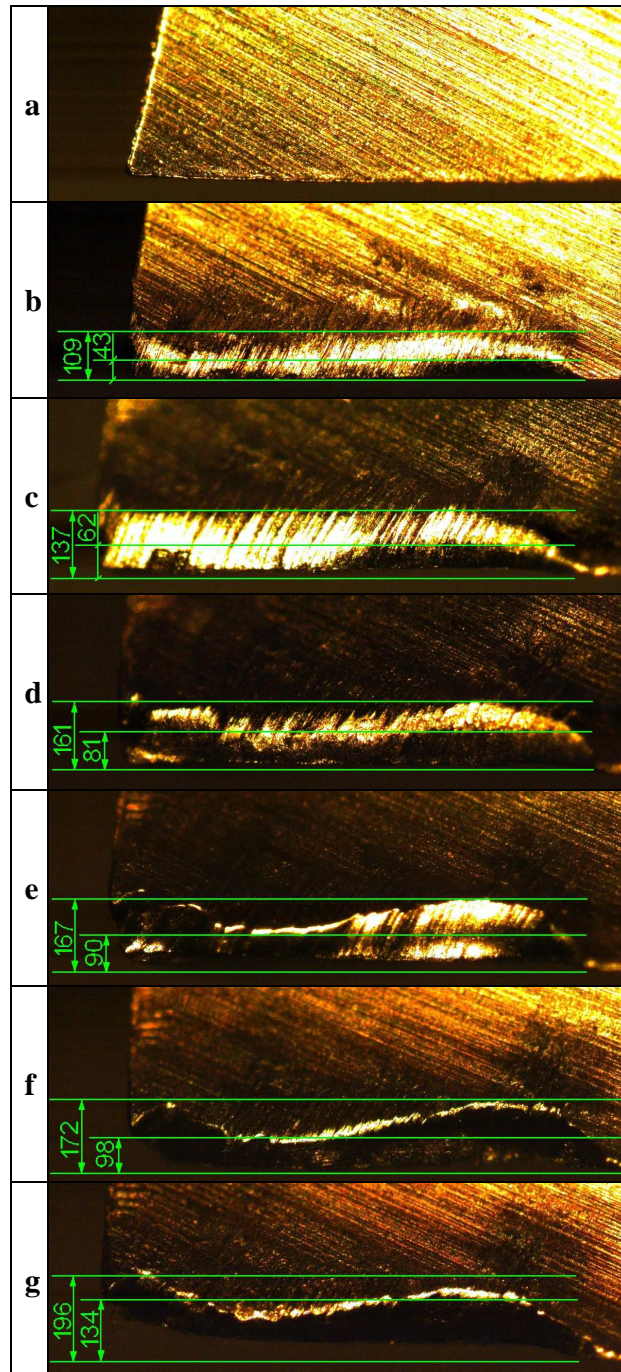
MTE 9mm end mill tooth # 3 trochoidal toolpath rake face wear a) Fresh tool, b-g) After pass 1-6 (each 54 mm length, 27 mm width, 1 mm depth).
